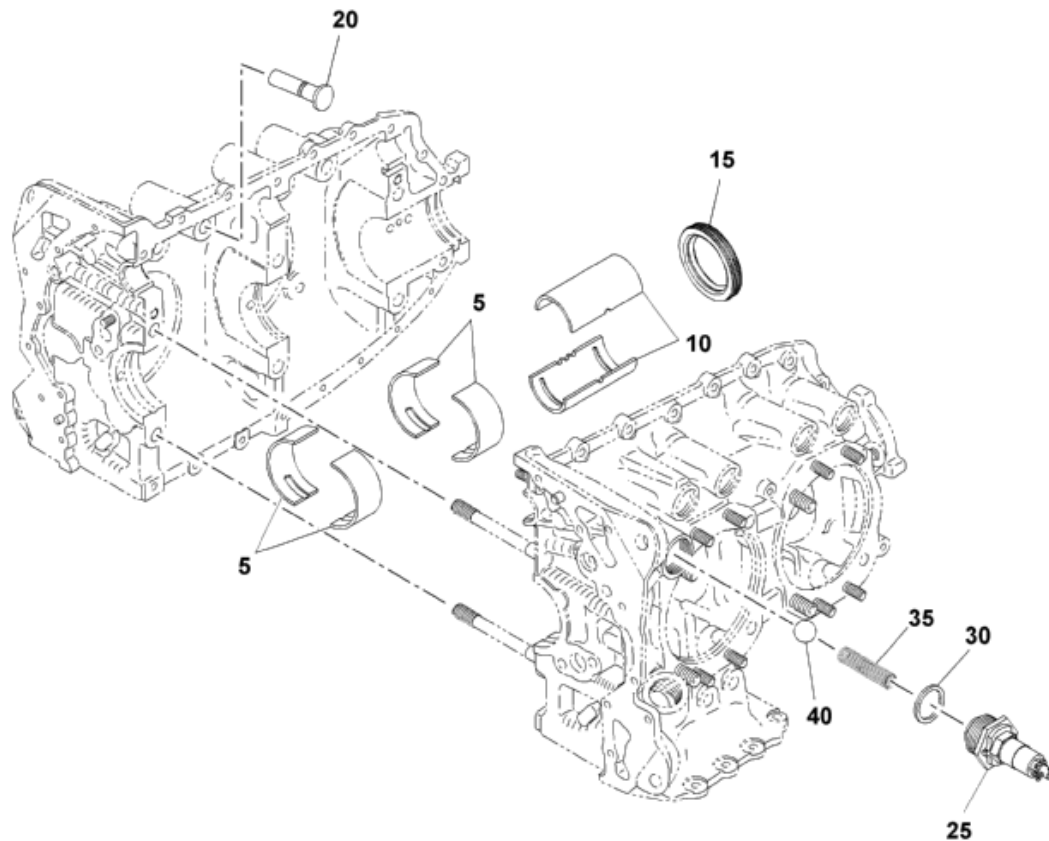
• Crankcase Bearing Retention Dowel
